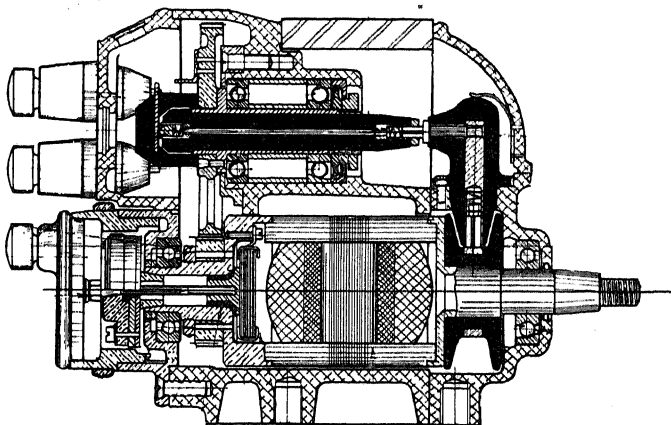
Sectional View of M.-L. (Type G 4) Light-weight 4-cylinder Magneto. This design is typical of the modern British rotating armature magneto.
